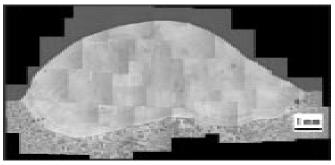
Optical micrograph of a cross section of a Fe-Cr-Al weld overlay deposit (Weld G)
